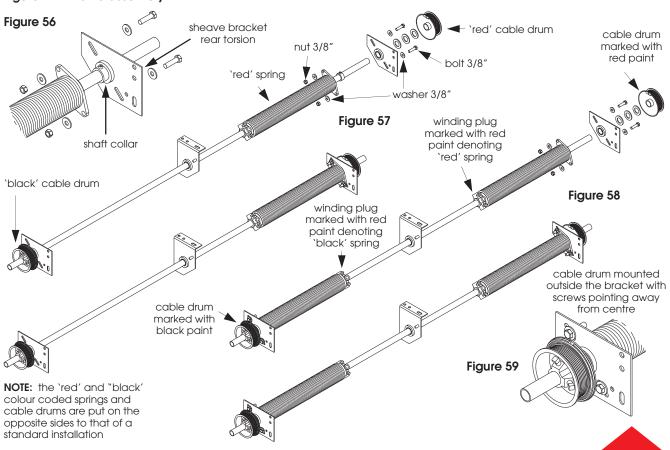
demonstrates a double spring rear torsion installation, which like a single spring rear torsion door has the springs mounted off the sides on the Flat Spring Anchor Brackets rather than the centre.
